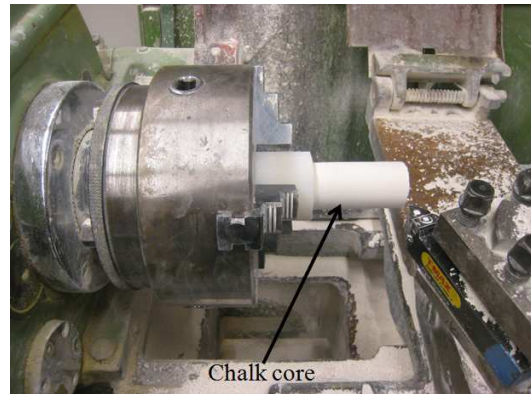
Closer view of how the cylindrical core is mounted in the lathe.
